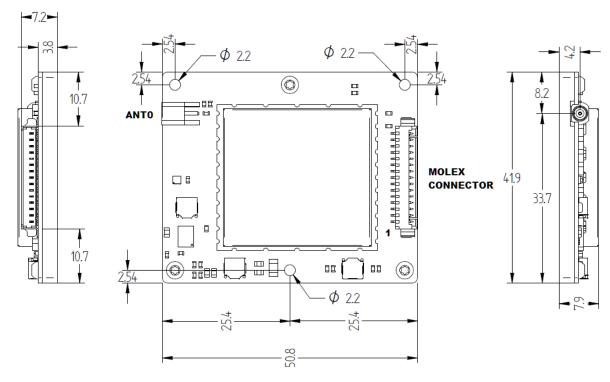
R7101C Lepton⁷x1 mechanical drawings and connectors location (units: mm)
